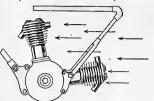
A twin engine, the front cylinder of which is nearly horizontal, thus allowing the rear one to be effectively cooled.
